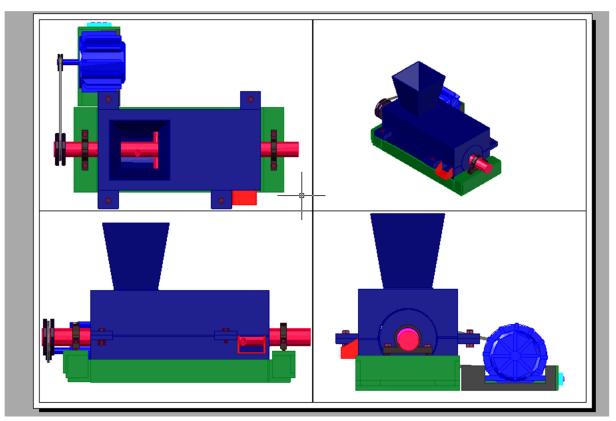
Isometric and Orthographic views of the designed Table top palm fruit Milling Machine.
